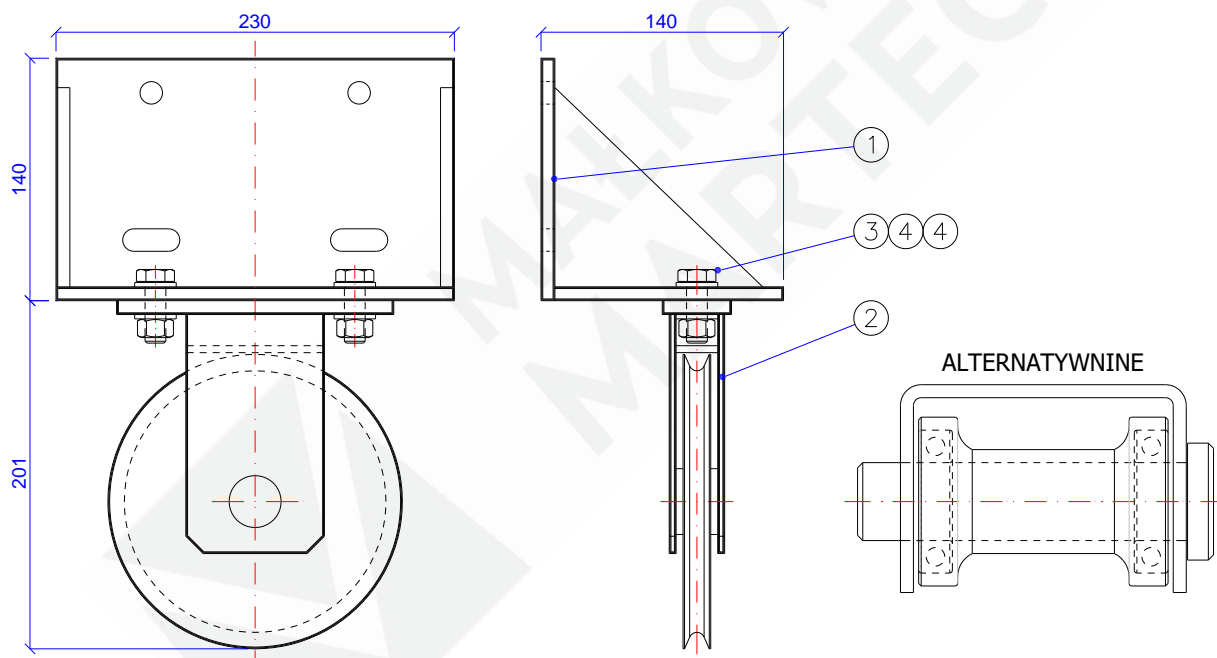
MARC-O120-01.04.00 [Line pulley assembly]
